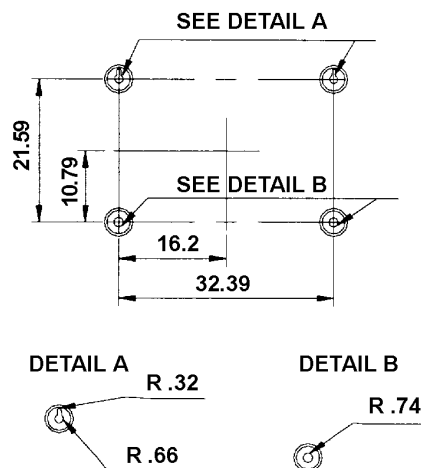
Mounting dimensions for item 6003AK pier interconnection box.
